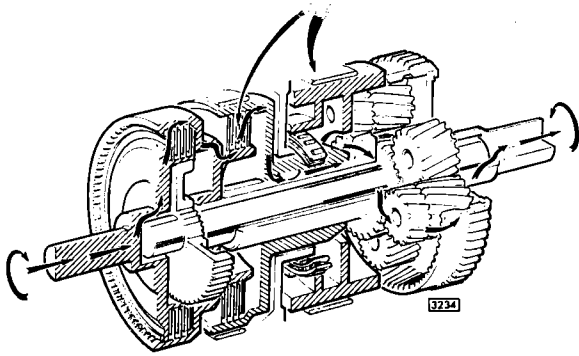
Mechanical power flow — Reverse gear (R) selected
